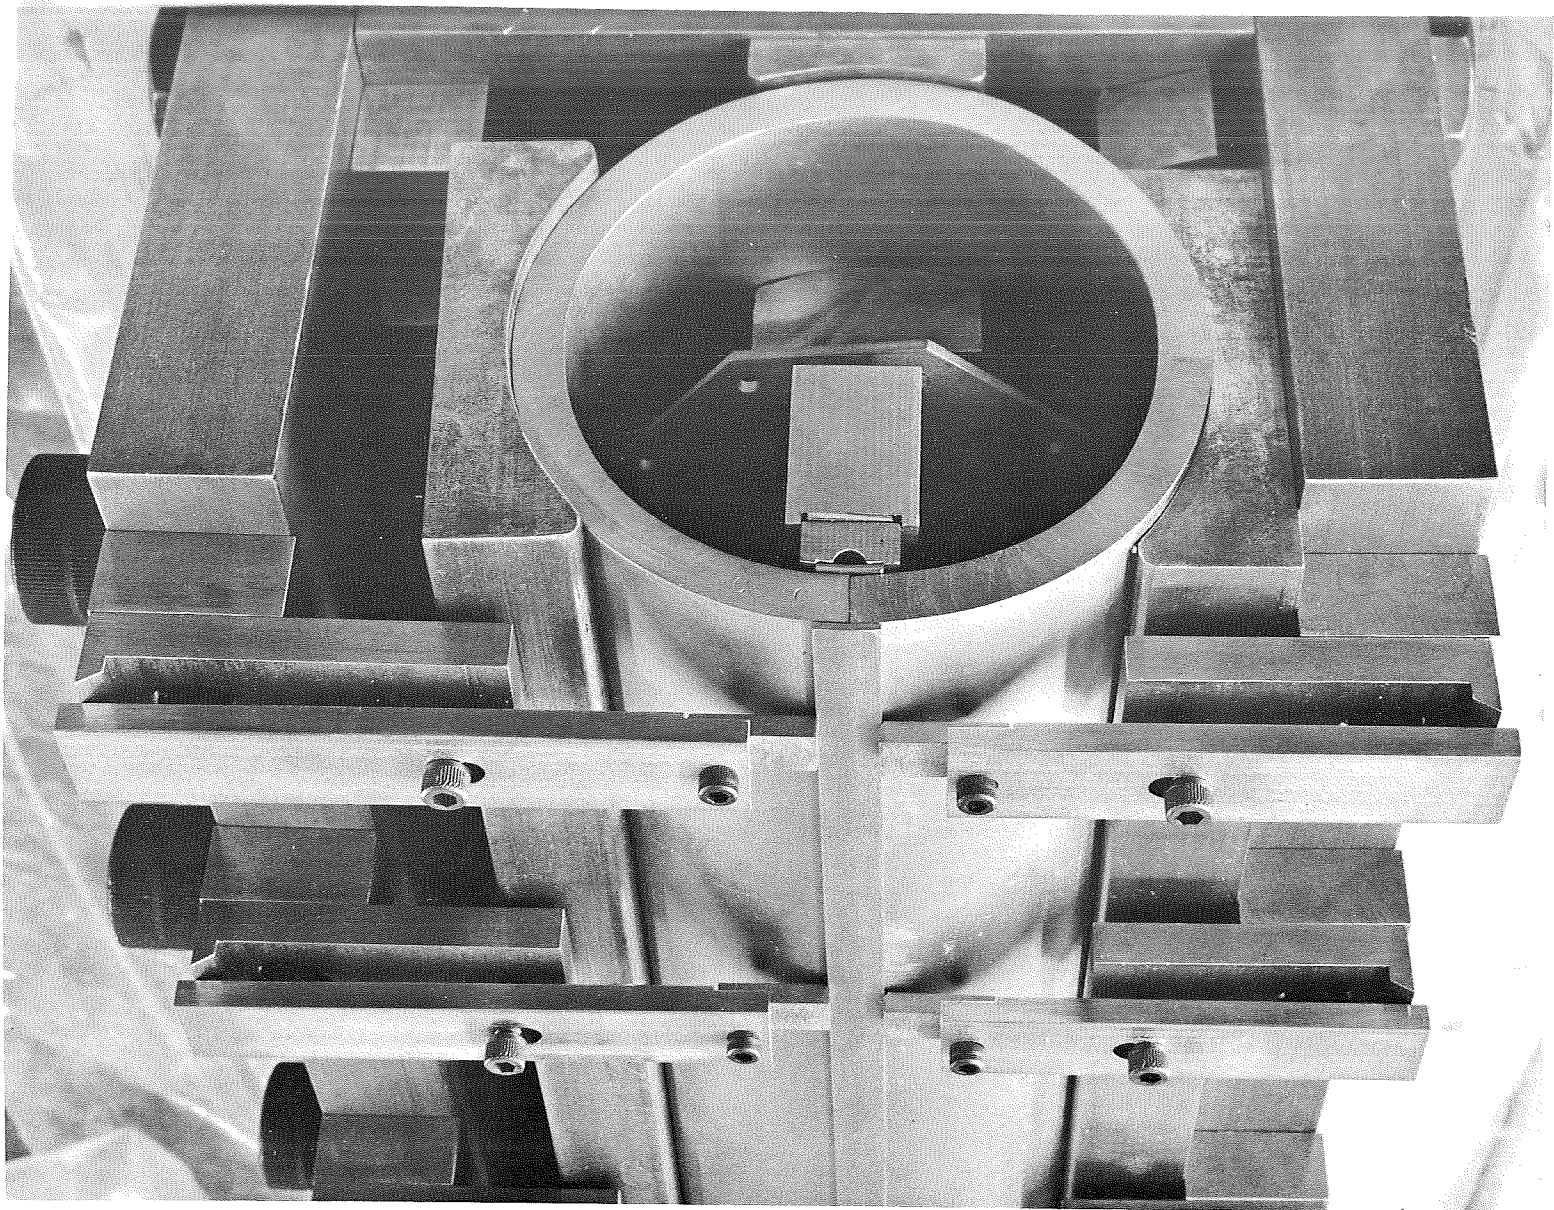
T-111 Tube Shell with OD and ID Filler Strips in Place
